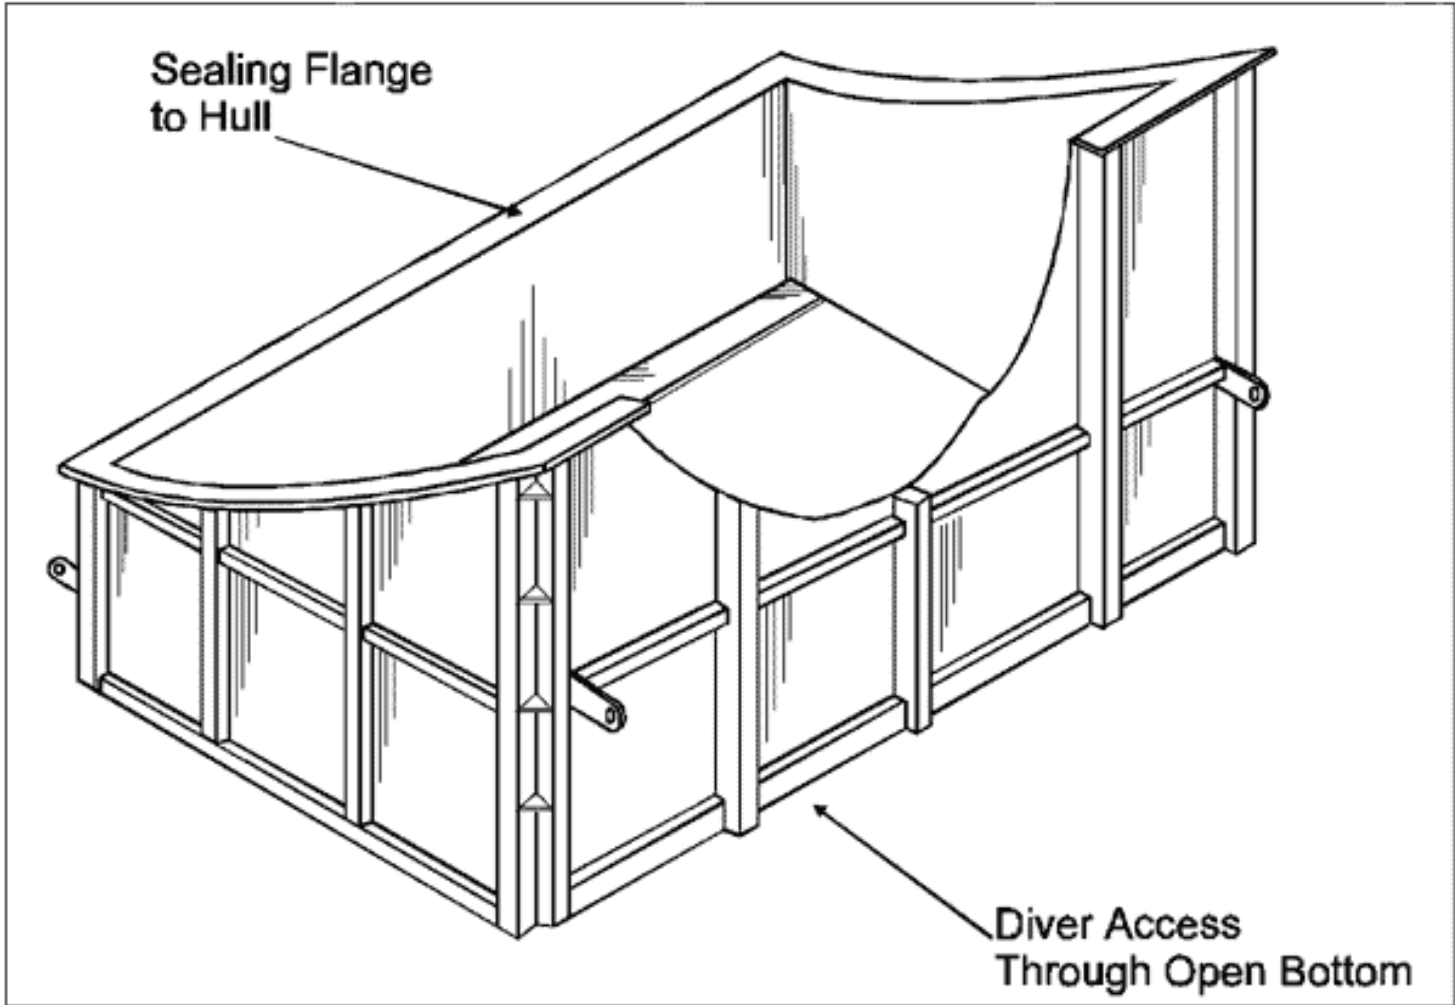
Typical Open Bottom Dry Chamber - APU Cofferdam.
